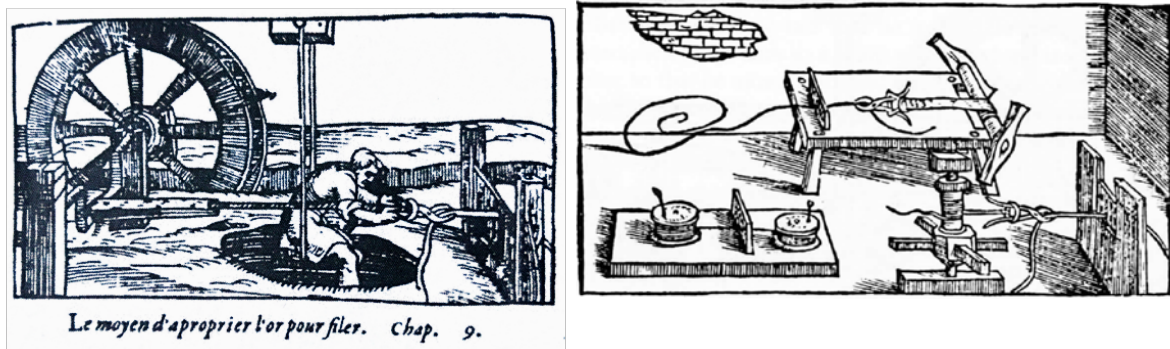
Wire drawing, Biringuccio (left: Heavy wire drawing by the means of water power: capstan and windlass ; right: manual drawing of finer wire)⁵³
